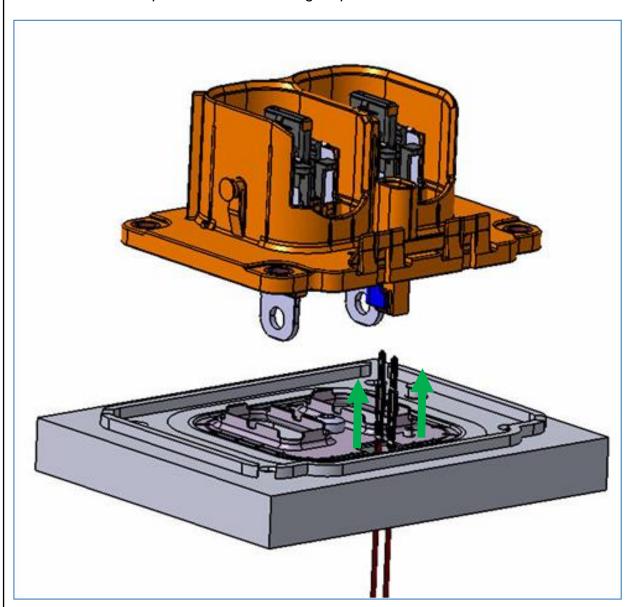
Passing the Interlock wires through the device (exemplary Figure of tab header 2way)
